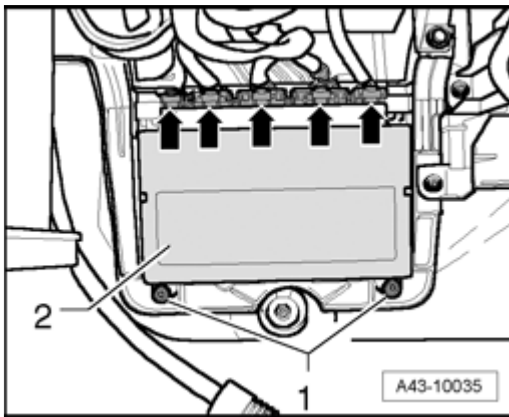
Identifying Bolts, Control Module, And Electrical Harness Connector
